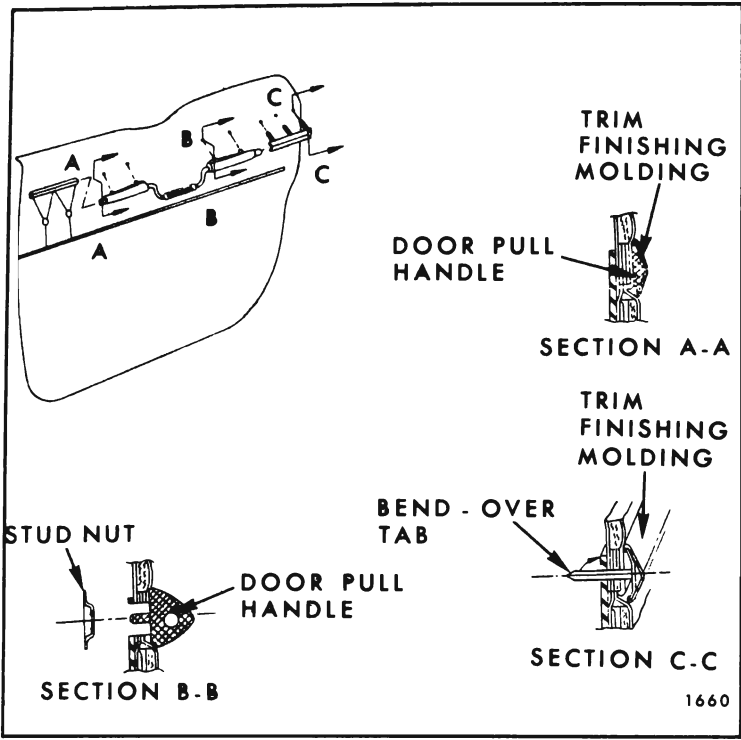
Door Pull Handle Installation - 38000 Series Shown - 39000 Series Similar
